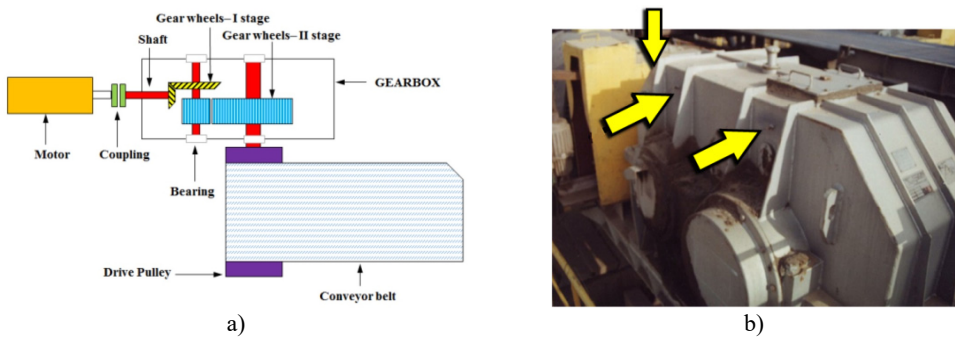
a) Scheme of the investigated machine, b) location of sensors on gearbox housing
